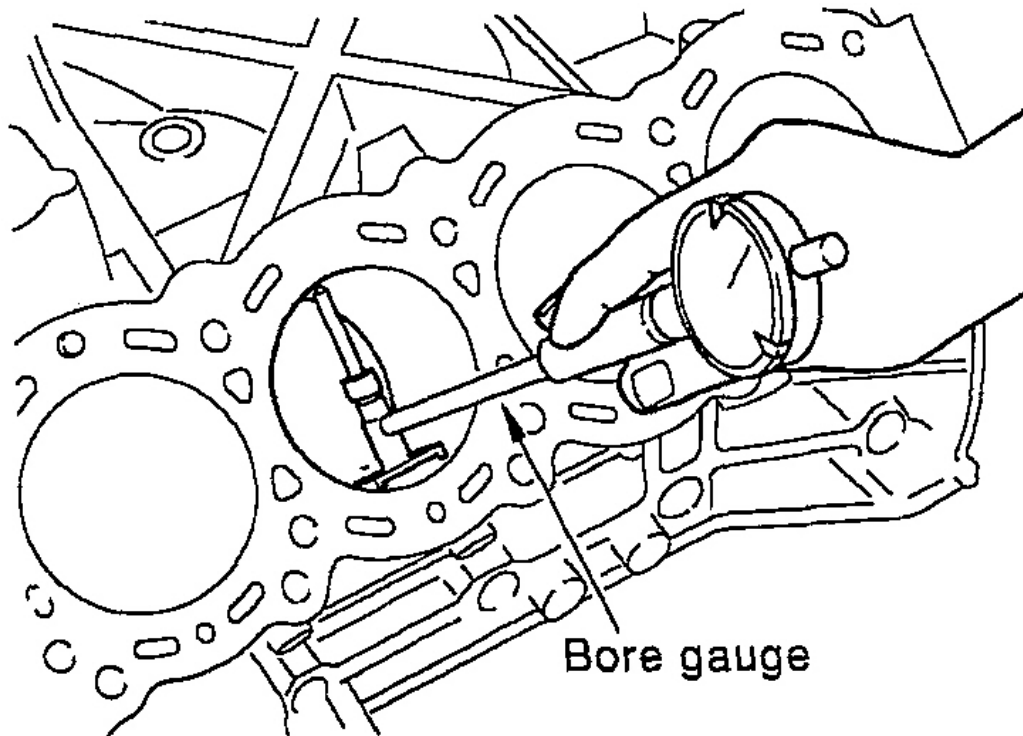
Checking Inner Diameter of Cylinder Bore (1 Of 2)
